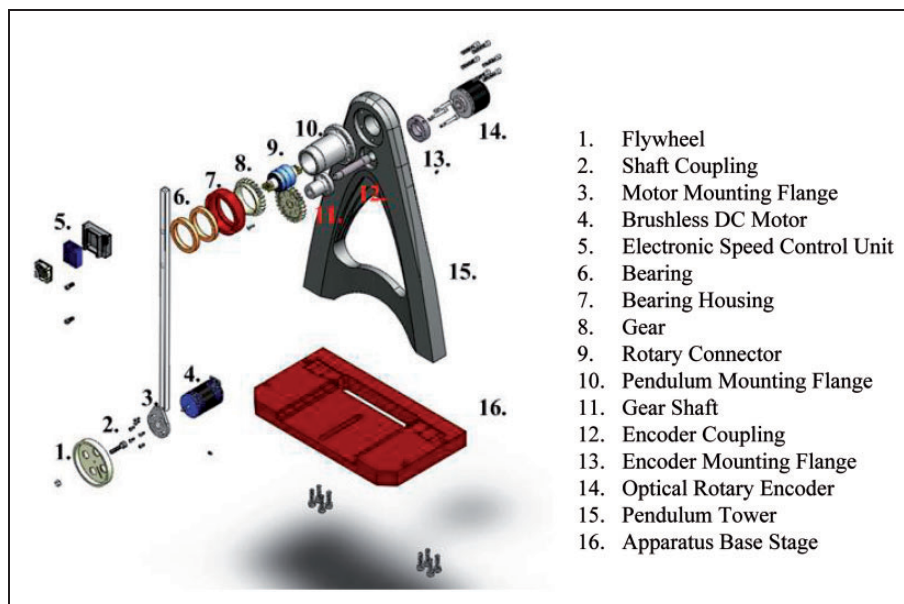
Exploded views of the proposed inertia flywheel pendulum.
